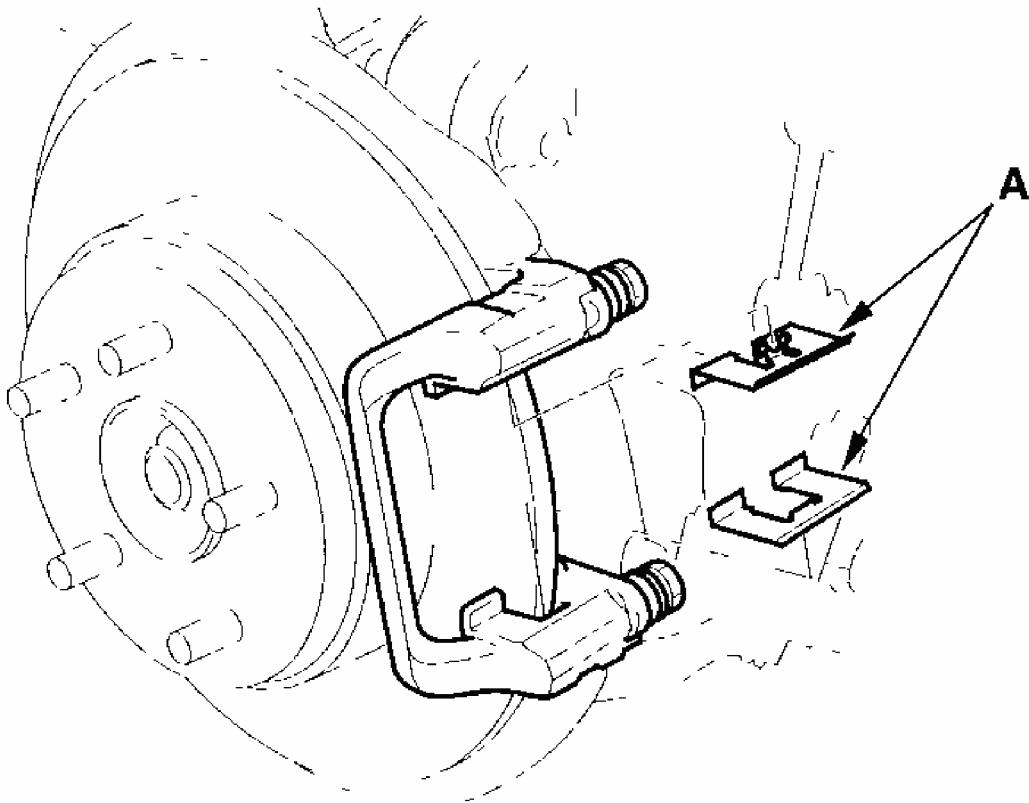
Removing Pad Shim And Inner Pad And Outer Pad
